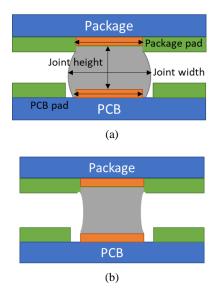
Cross-sectional view of a typical solder joint with the key dimensions marked, and 3b Ideal joint shape preferred from HSIO perspective.
